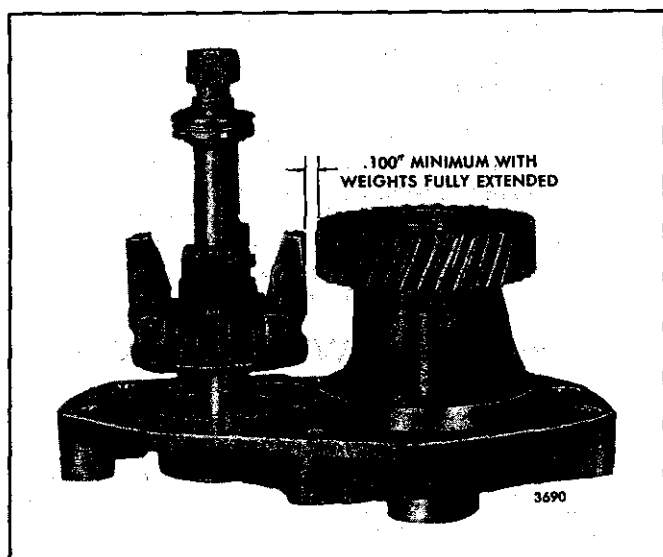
Minimum Clearance Between Blower Drive Gear and Governor Weights
